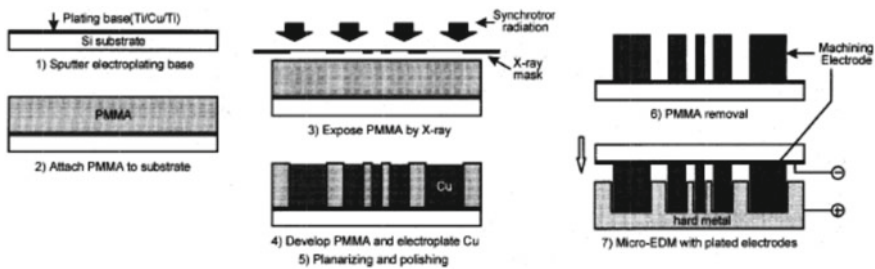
Steps of an array of micro-hole fabrication; a, b tool fabrication c, d micro-hole machining [14]
